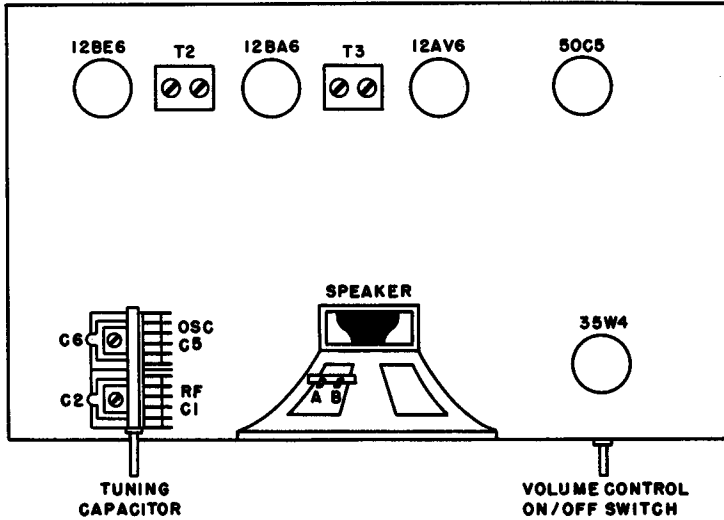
Top view of chassis of the receiver shown in Fig. 25.
